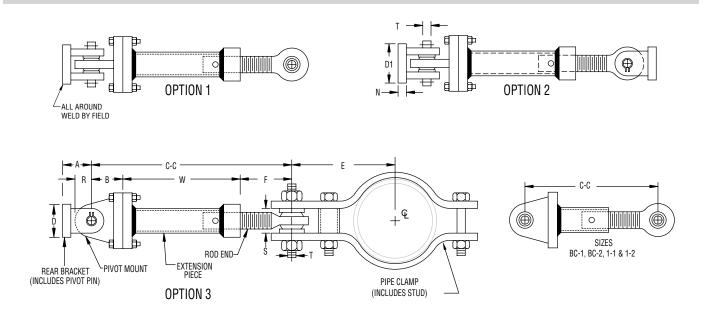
, C-222: LOADS (LBS) • DIMENSIONS (IN)
